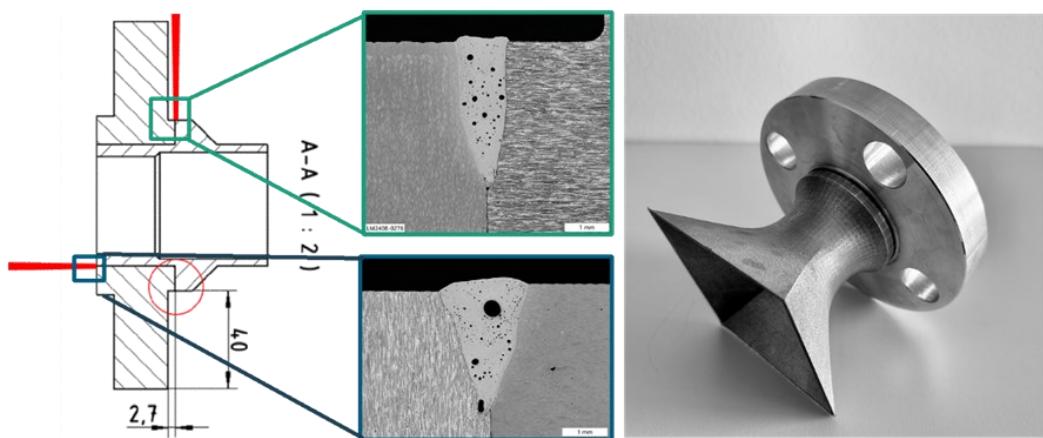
Demonstrator with a radial and an axial weld between AlSi7Mg0,6 and EN AW-5083
